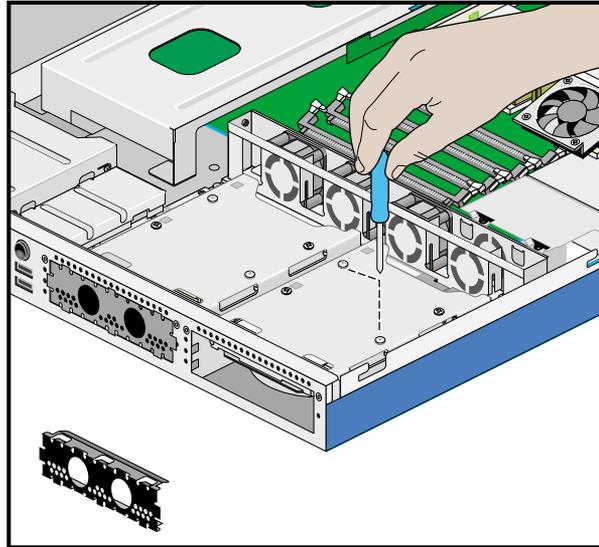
Removing Two of Four Hard Disk Drive Screws
